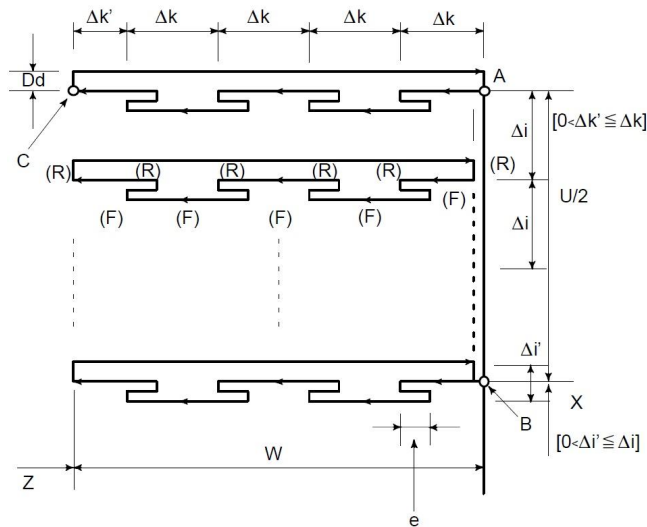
Cutting Path in End Face Peck Drilling Cycle
